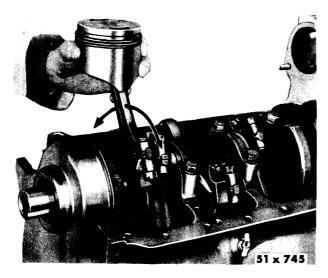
Checking Connecting Rod Bearing Clearance (Typical)
